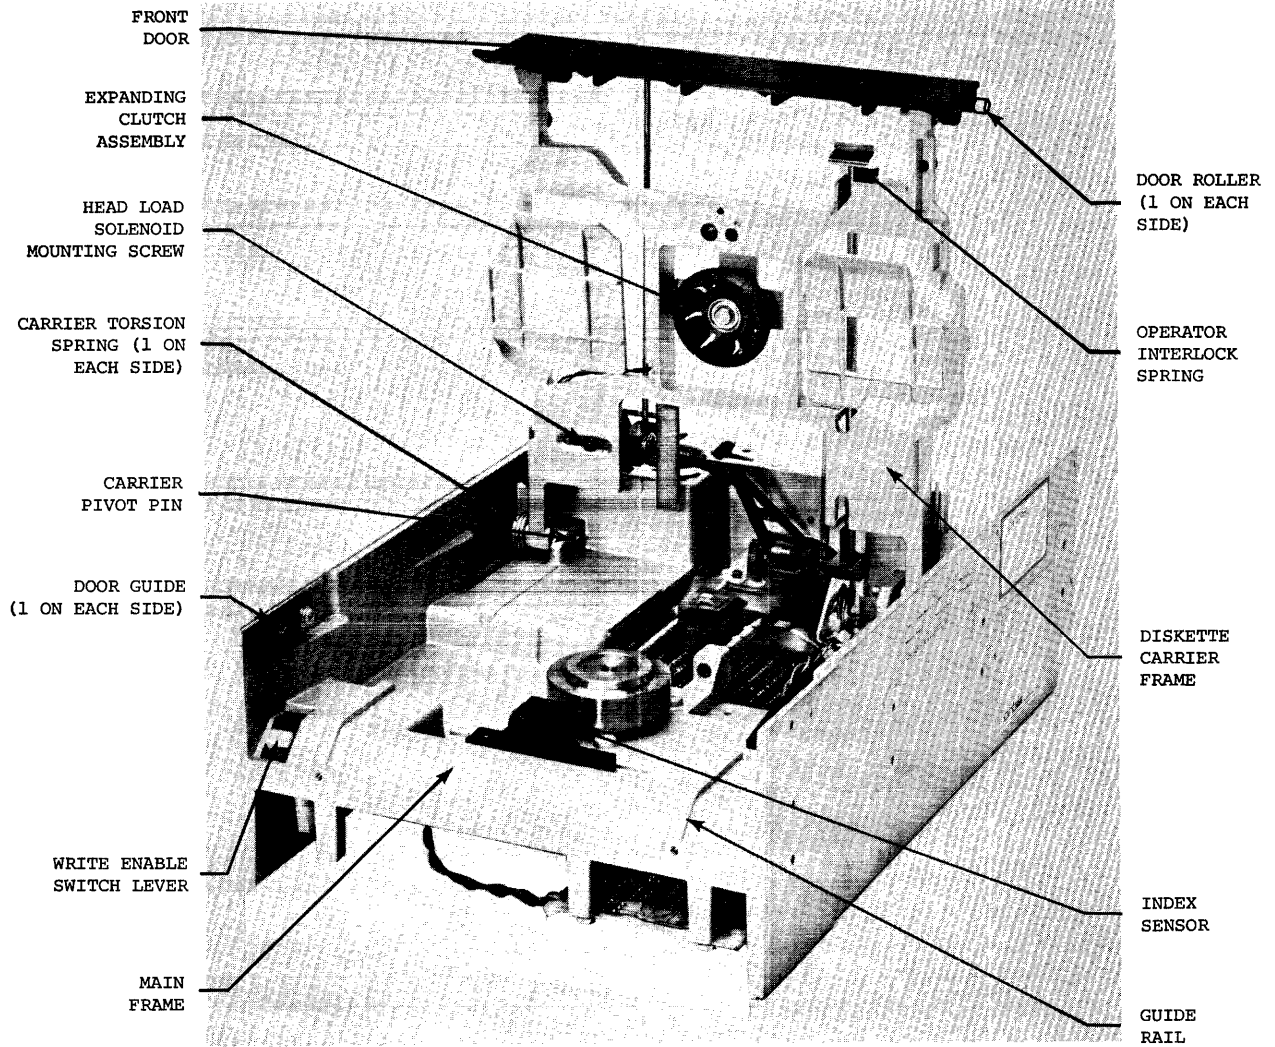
Front View of Model 76 Diskette Drive with Carrier Open
